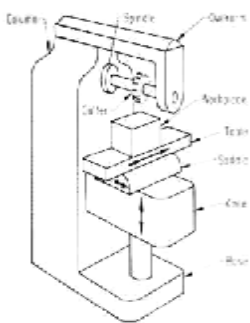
Principal components of a plan knee-and-column milling machine with a horizontal spindle
